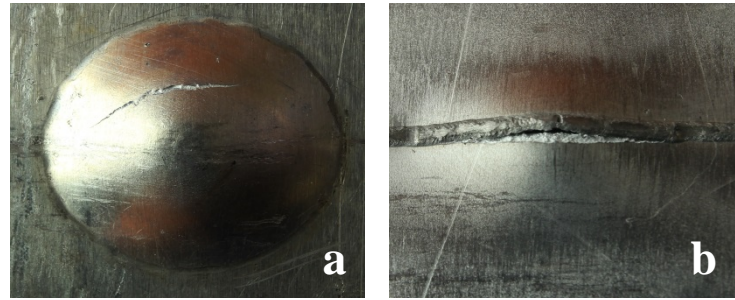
Appearance of (a) base material and (b) single pass weld after Erichsen Cupping test.
